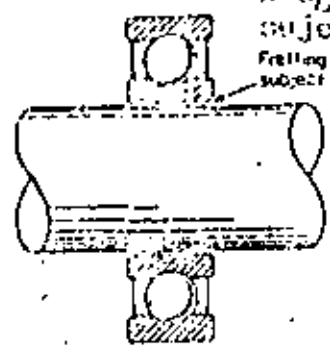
Example of typical fretting corrosion location.
